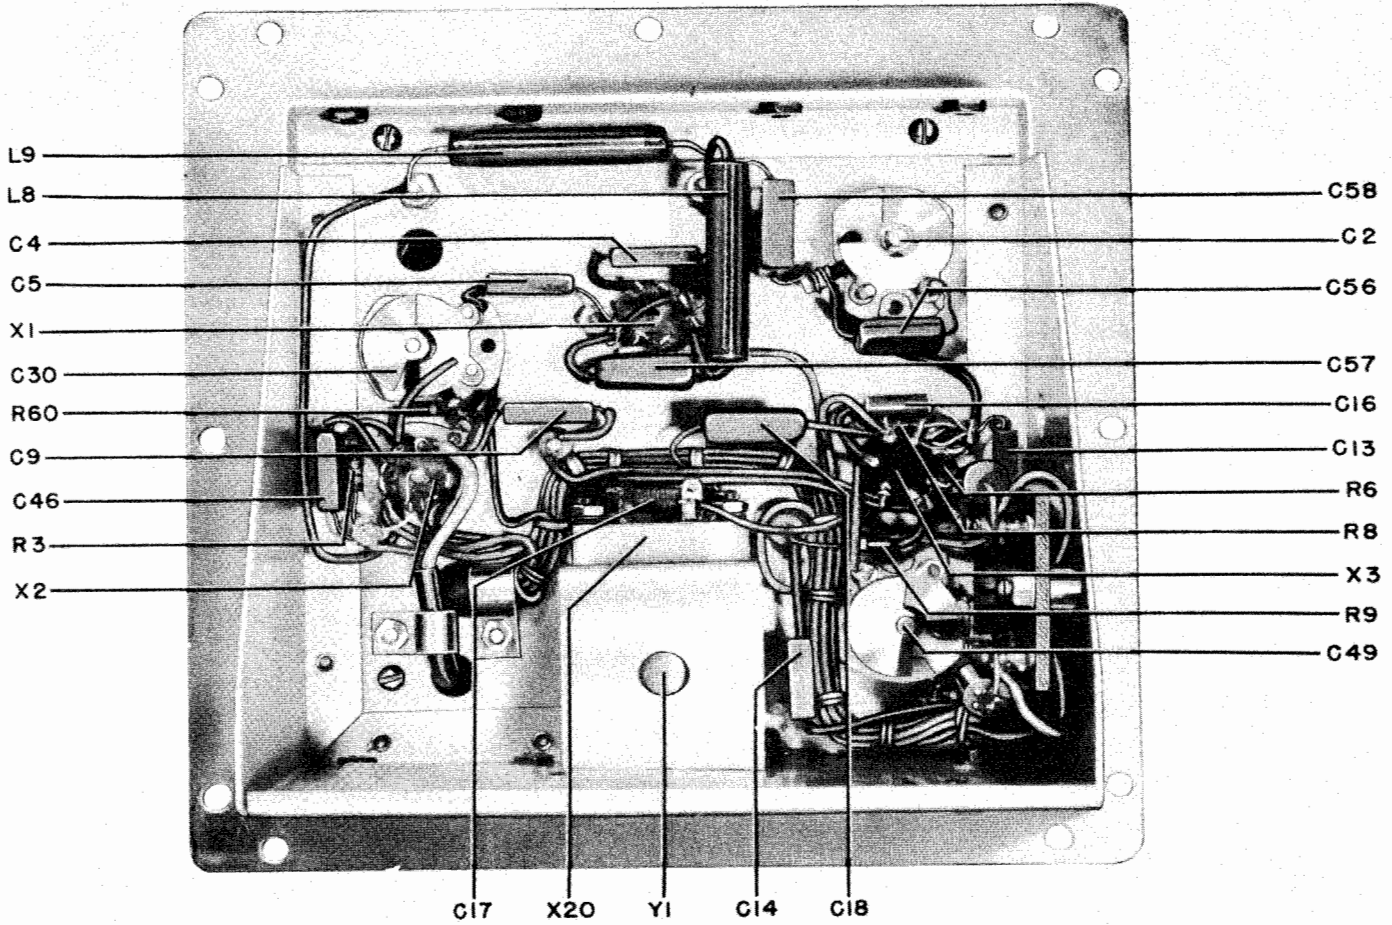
Inner Oven With Tuning Unit Removed, Location of Parts
